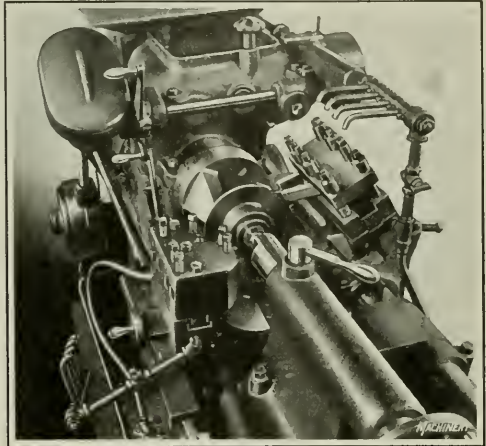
Another Tooling Equipment for machining a Rear Hub in a Fay Automatic Lathe
